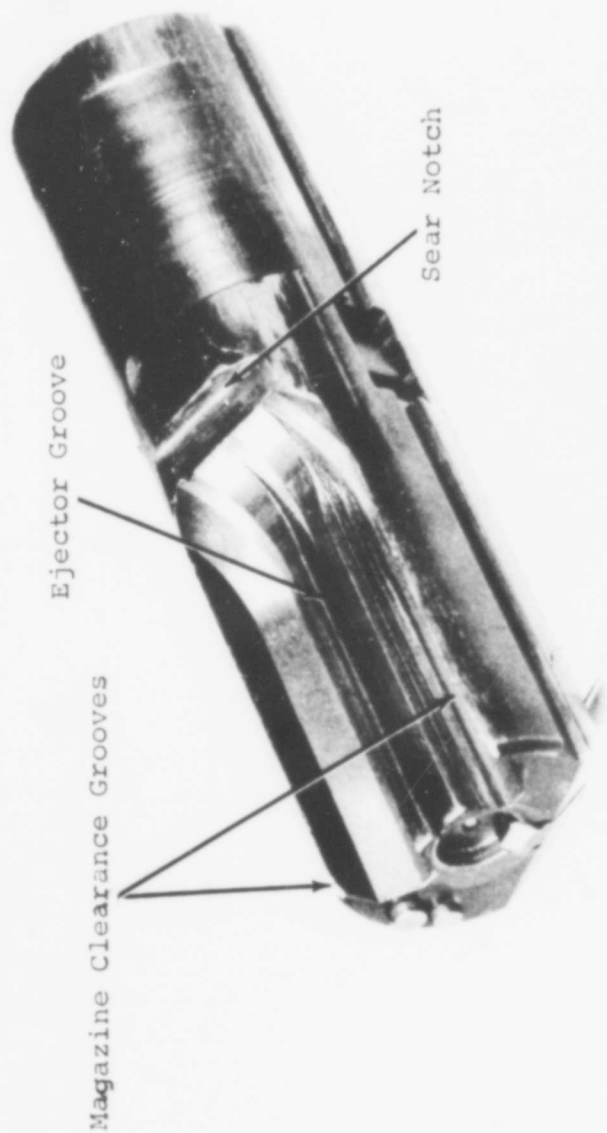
Underside of bolt showing sear notch, ejector and magazine clearance grooves.
